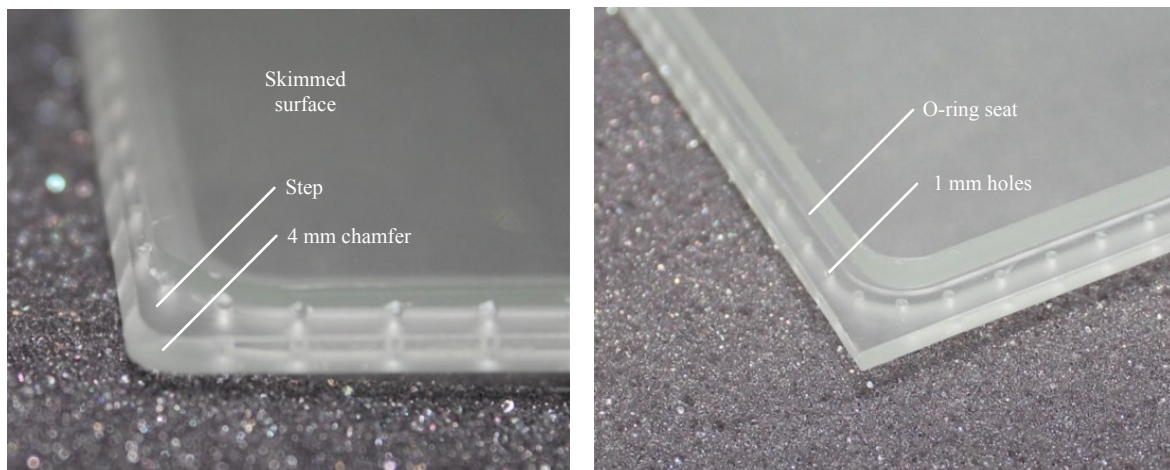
TPX Machining Operations. Left – the step and chamfer are machined in the first operation. Right – In the second operation, the thickness is reduced by 4 mm and the O-ring seat and 1 mm holes are added.
